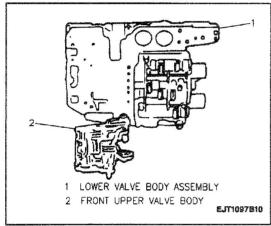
Installing Lower Valve Body to Front Upper Valve Body
